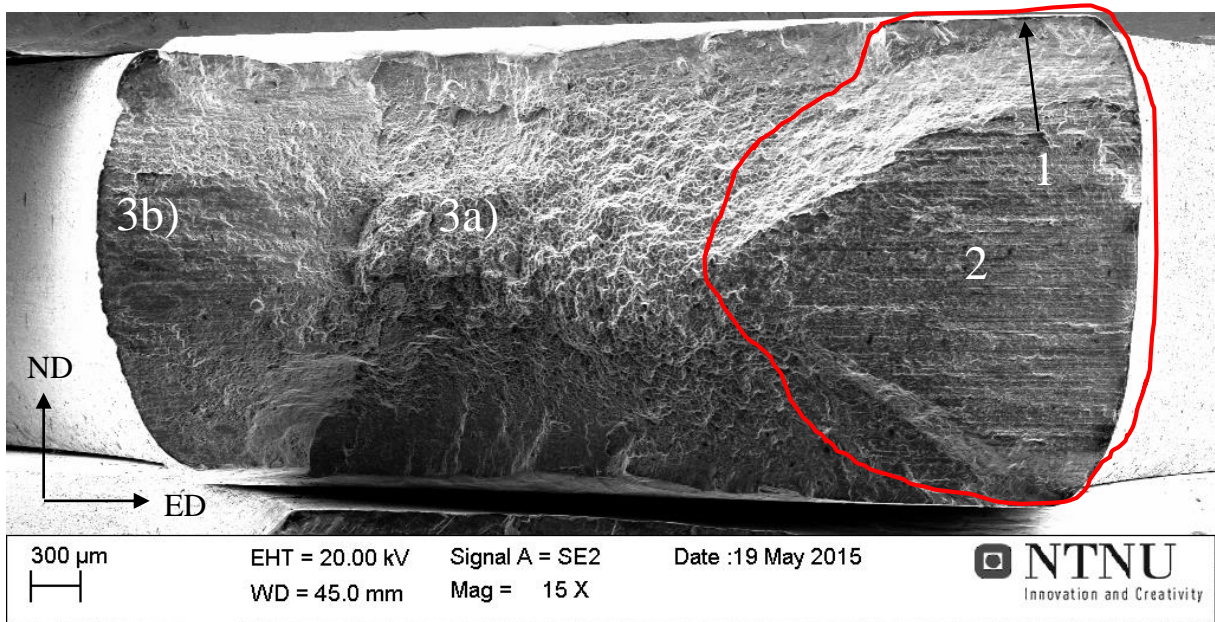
An overview of the fractured surface of AA6082 T4 with the longest fatigue life, 15X magnification. The fatigue fractured area is enclosed by the red line.
